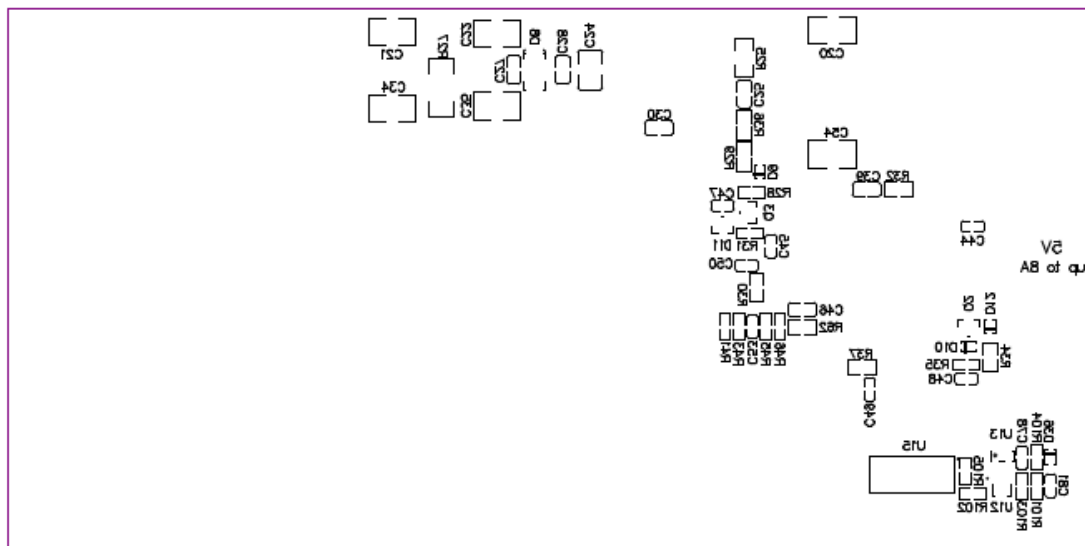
STEVAL-POE002V1 evaluation board: PCB layer 1
